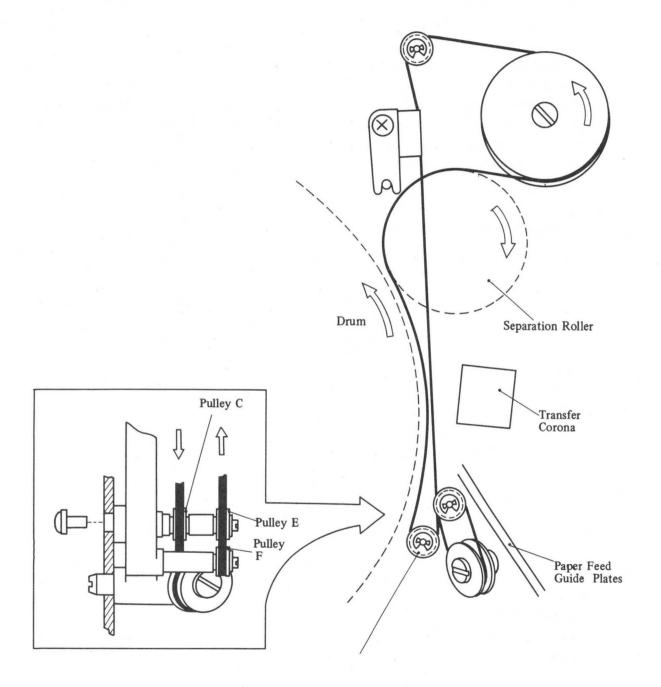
Movement of Separation Belt (from copier rear) Fig. 4-96 depicts the Paper Separating Subassembly in its normal operating position. As the main drive motor (M1) turns the drum, the separation roller is also driven (see arrows). The movements of these components drive the separation belt around its endless path at the same rate of speed as the drum.
